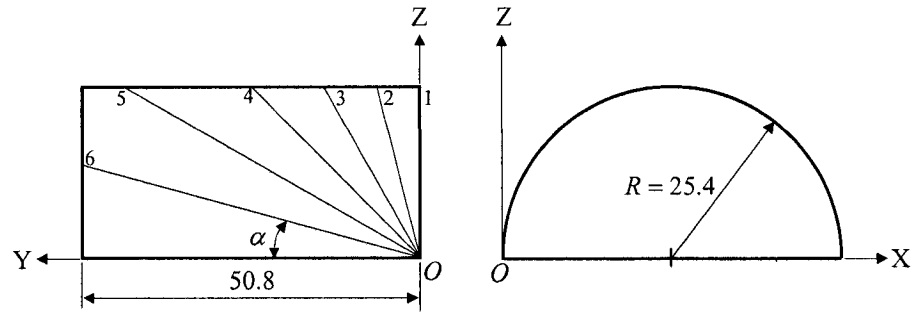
Six tool paths on a regular semi-cylindrical surface part.
